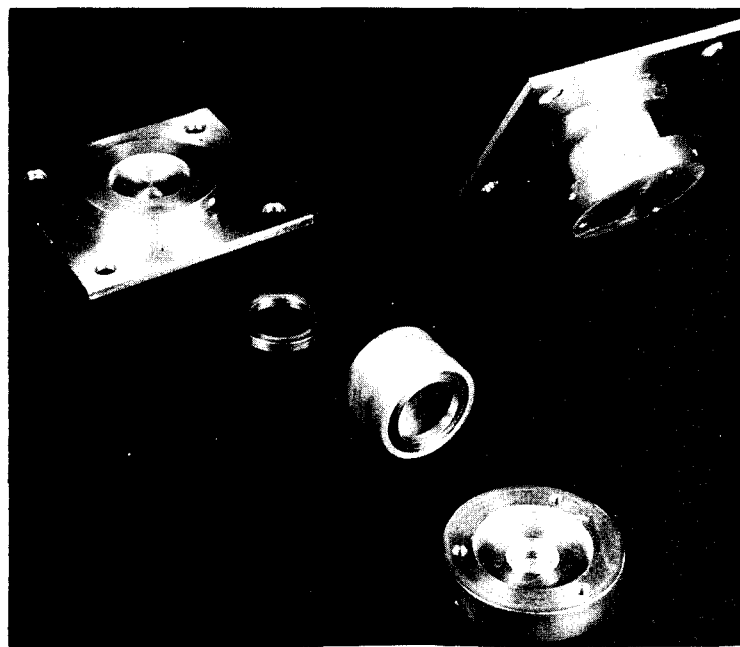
Thermal Test Sample Shown Disassembled and Assembled
